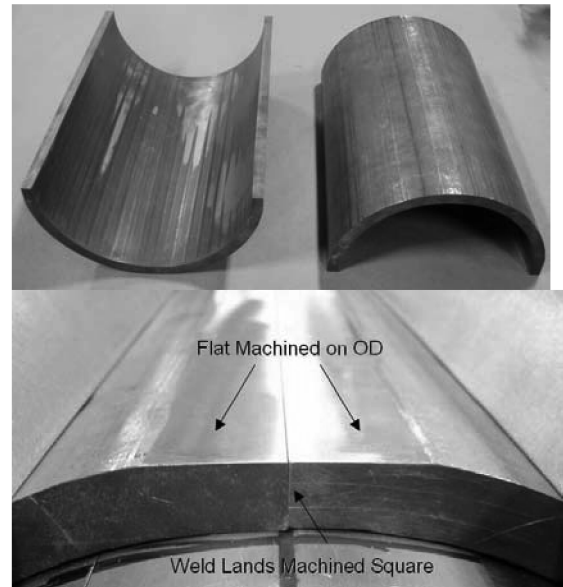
Bump-formed and machined half cylinders before welding.
